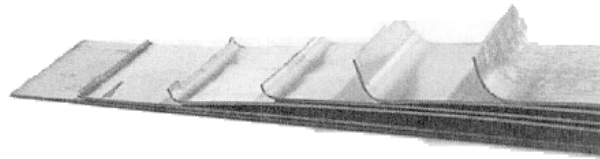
Experimental DP780 specimens from BUT tests. The fracture mode change when increasing die radius [63].
